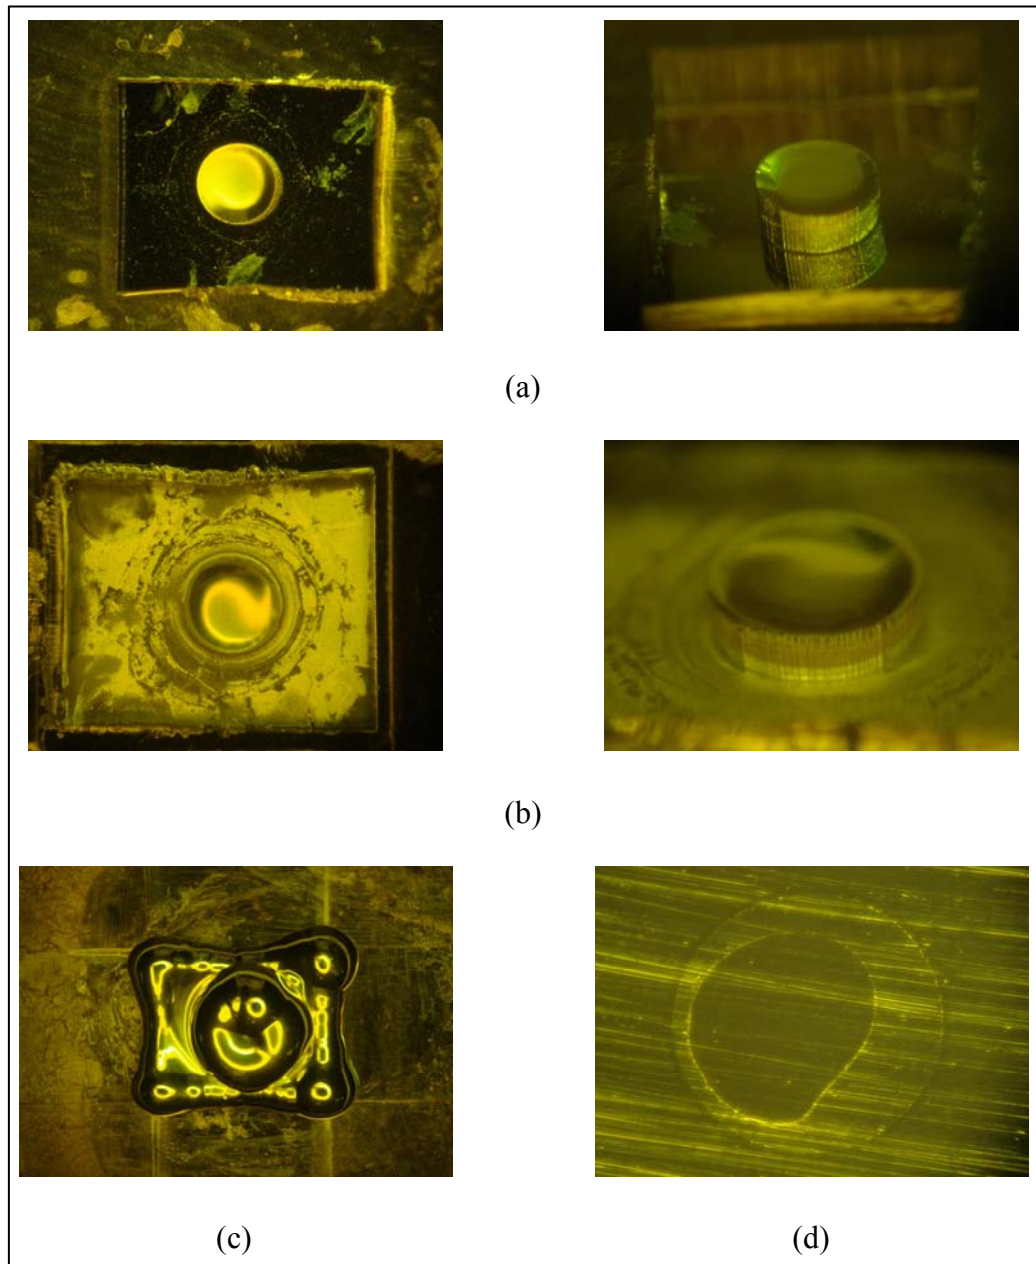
Fabrication sequences of piston (a) The SU-8 mold for the cylinder electroplating (b) growing of silver sacrificial layer (c) the cylinder electroplating and (d) the mechanical polishing to expose the silver ring.
